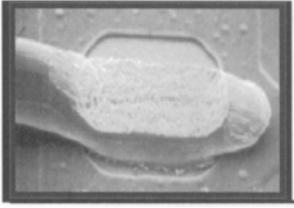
(a) Wedge formed with elliptical back radius tool [Courtesy: Gaiser Tool]
